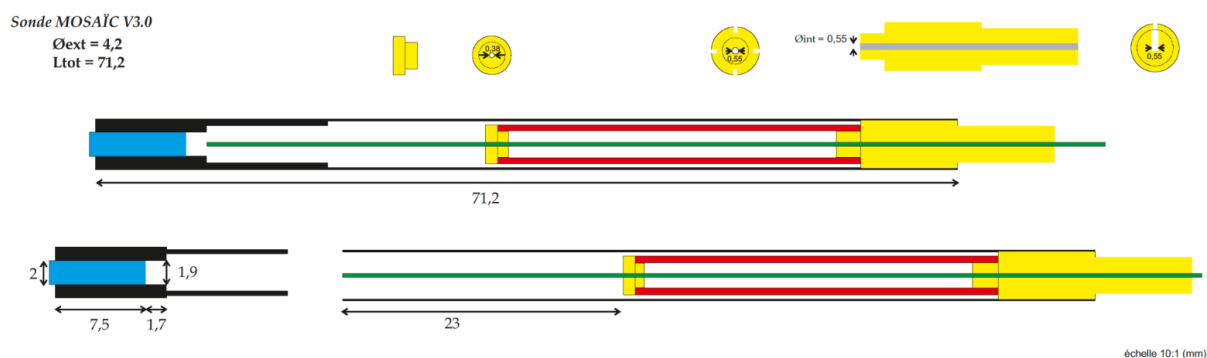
Mechanical design of the integrated probe, dimensions are indicated in mm. Courtesy of Marc Fabert (XLIM).
